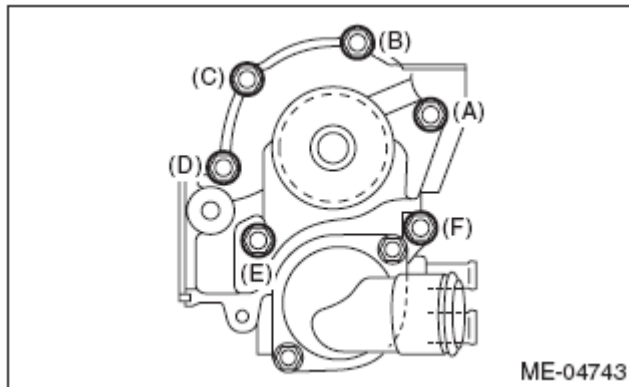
Identifying Tightening Sequence Of Water Pump Mounting Bolts
